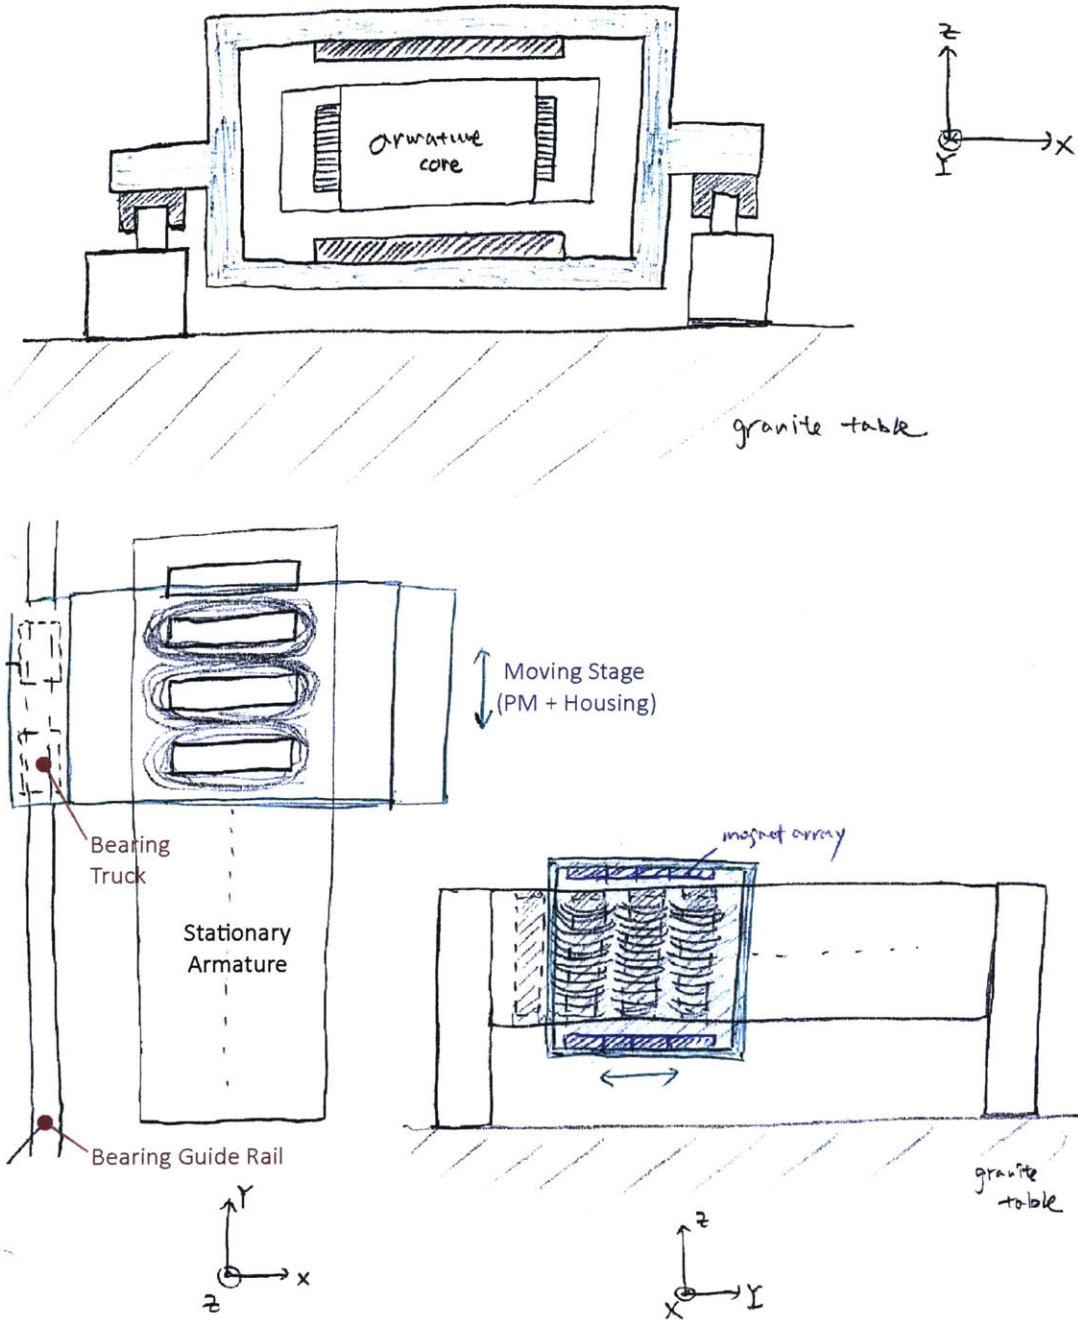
Hand sketch of a possible stage design with moving short magnet and stationary long coil. Moving magnets are configured outside. Front view (upper), top view (lower left), and side view (lower right).
